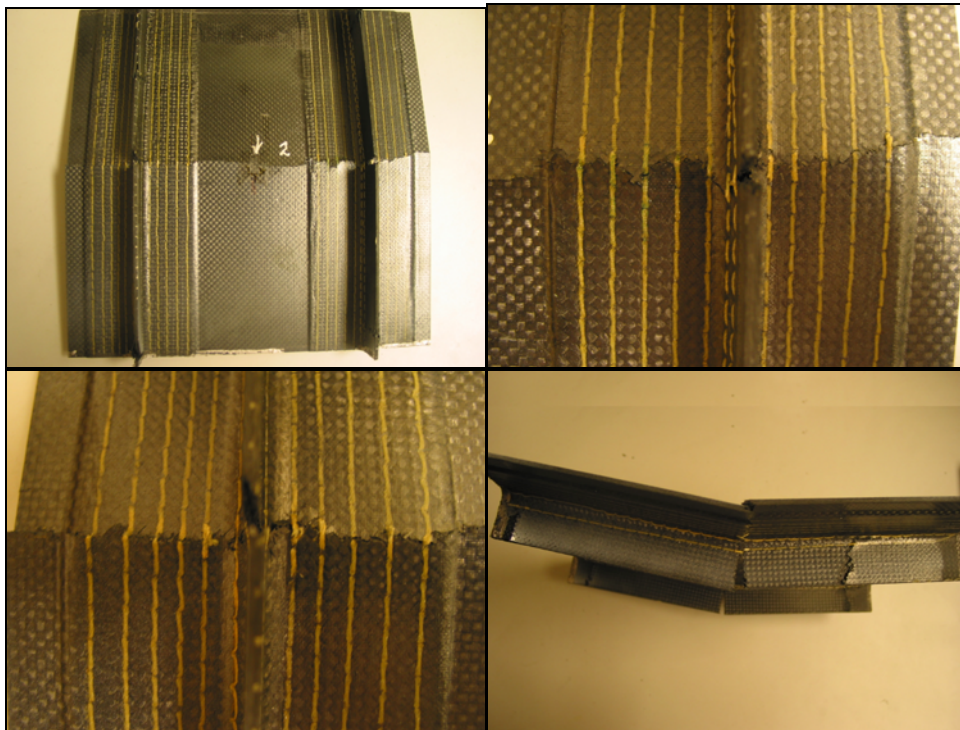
FAILED SPECIMEN (SEP3a): UNDAMAGED, SELECTIVELY STITCHED
